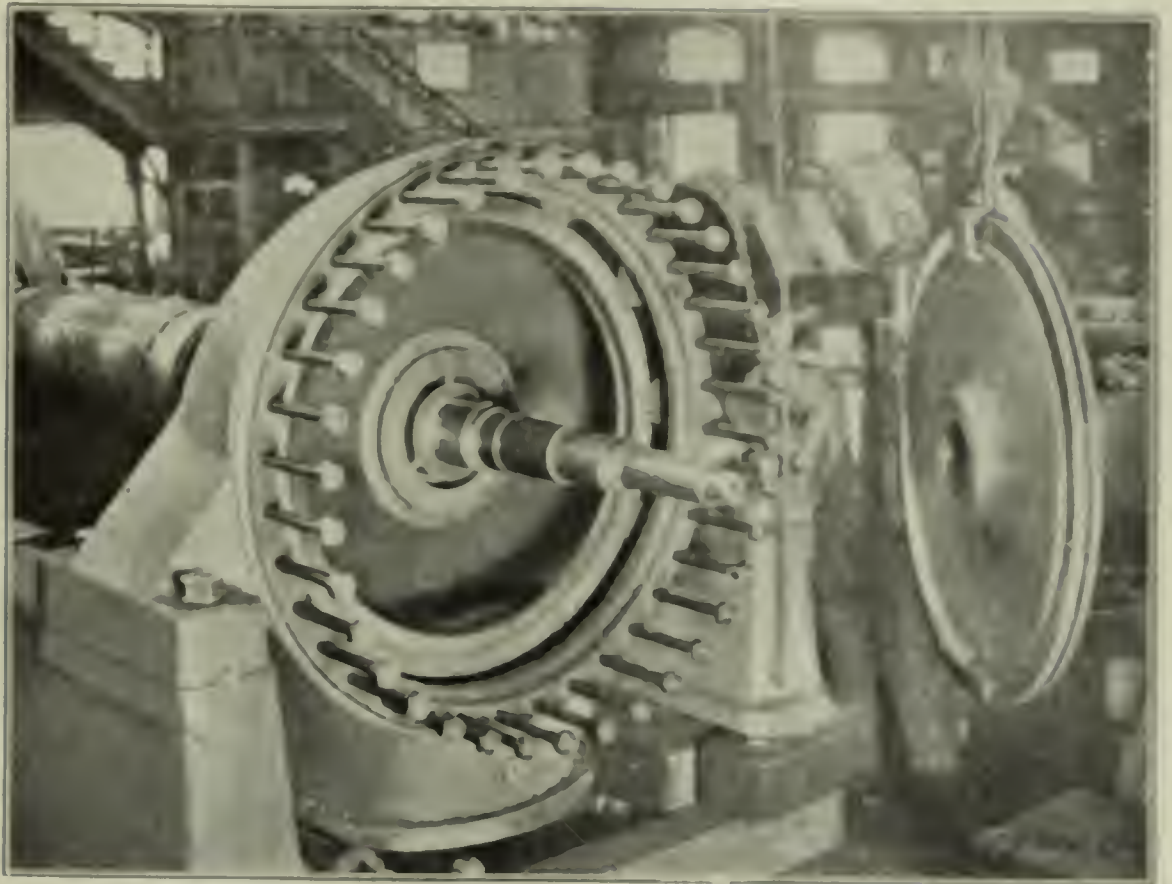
A VIEW SHOWING INDOOR CONSTRUCTION OF TURBINE
